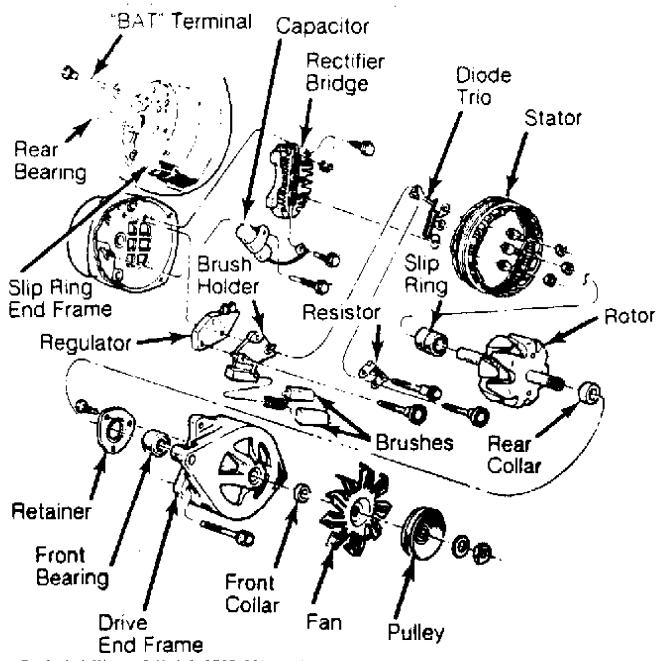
Exploded View of Model 17SI Alternator Courtesy of General Motors Corp.
